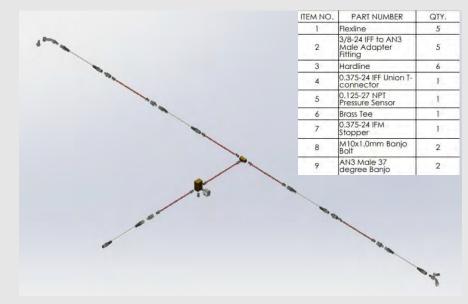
Flat Brake Line. Rogue consists of front and Rear independent brake lines.
